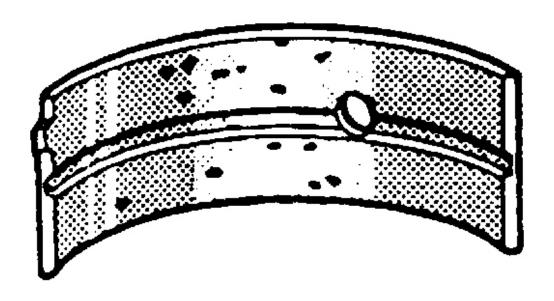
Identifying Crankshaft Bearing Craters Or Pockets Courtesy of GENERAL MOTORS CORP.
